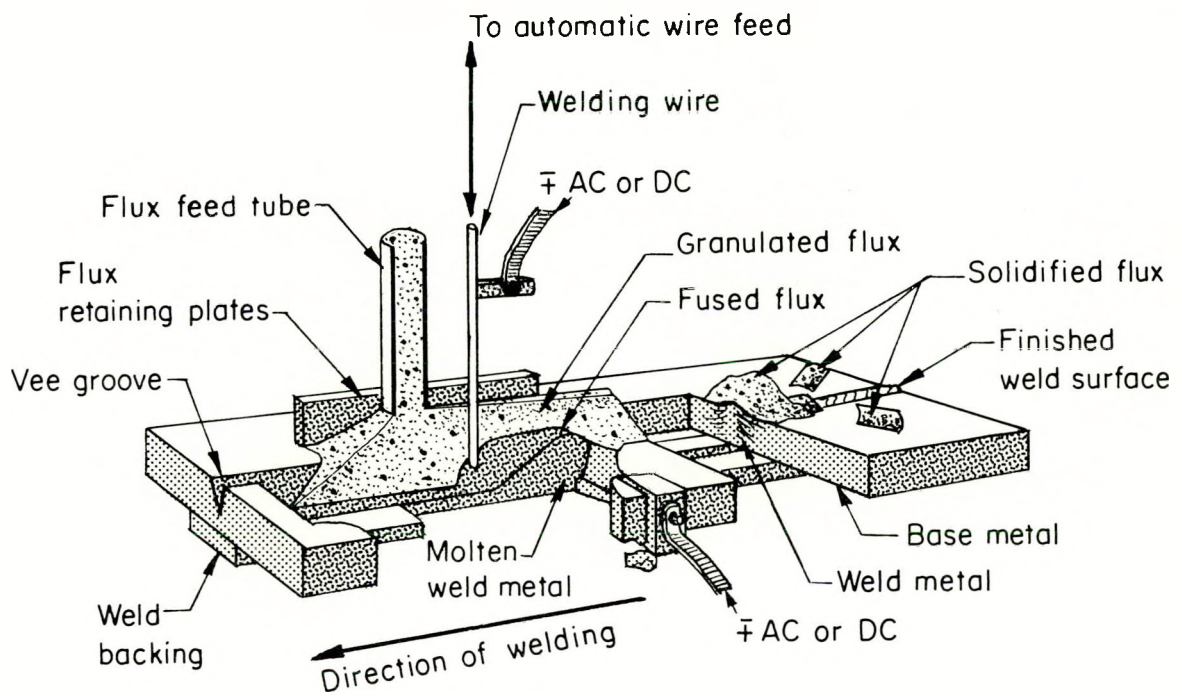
SKETCH OF SUBMERGED-ARC WELDING OPERATION
